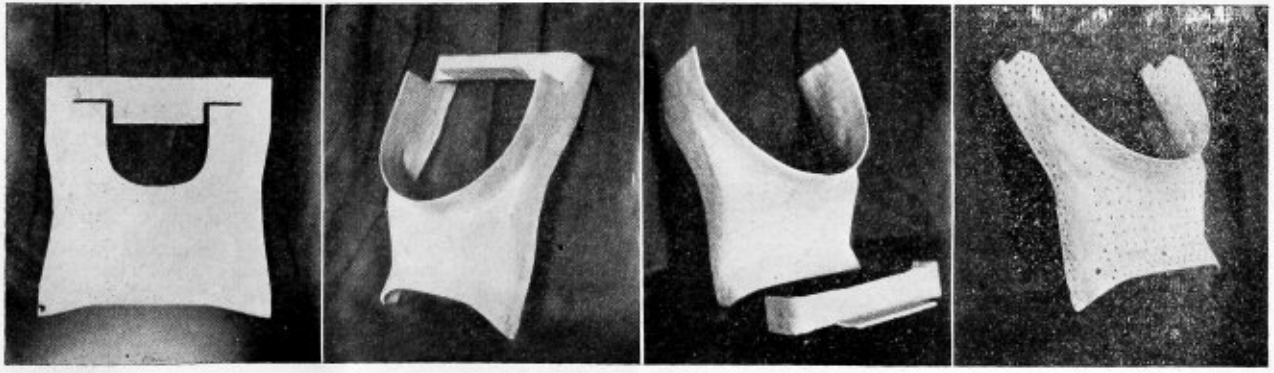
Successive Steps in the Operation of Flanging the Locomotive Throat Sheet
